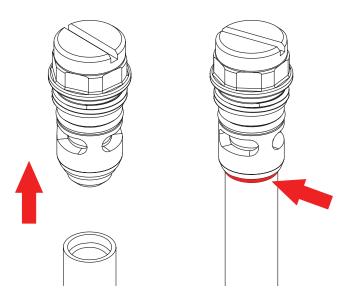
Replacing the Access Plugs to the Fluidizing Tubes
